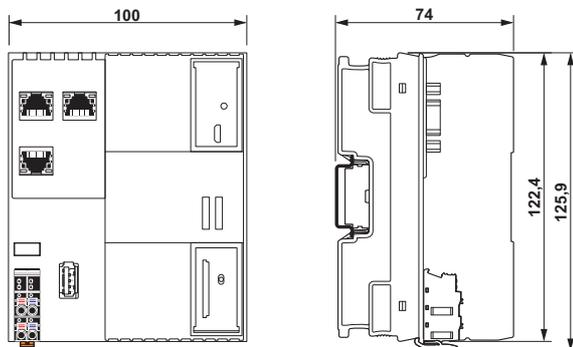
Nominal dimensions of the controller housing (type XM2x: e.g., XM21)
